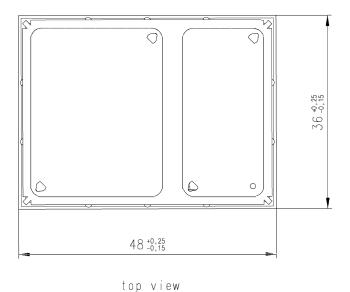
Dimensions of ALAS66A (all dimensions in mm)
